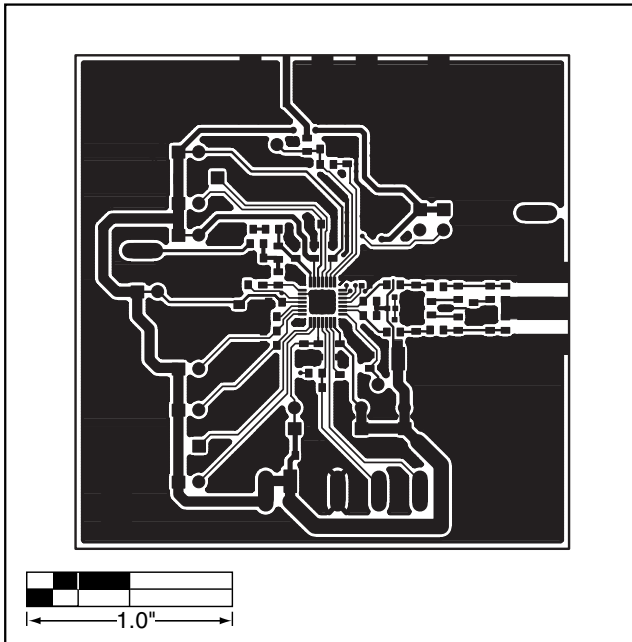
MAX2900-MAX2904 EV Kits PC Board Layout—Component Side
